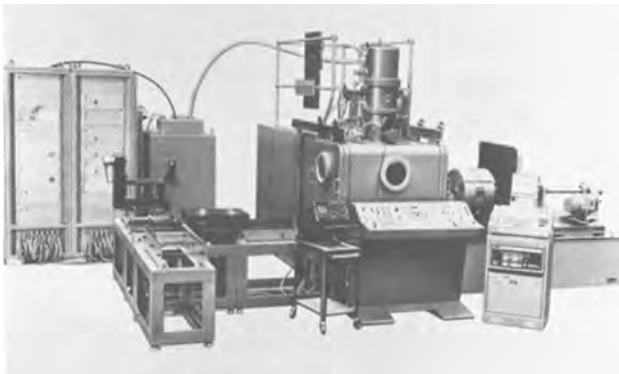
Micro machining installation. Courtesy: Mr. Jack Drew, Steigerwald Strahltechnik-Farrel Corporation.
